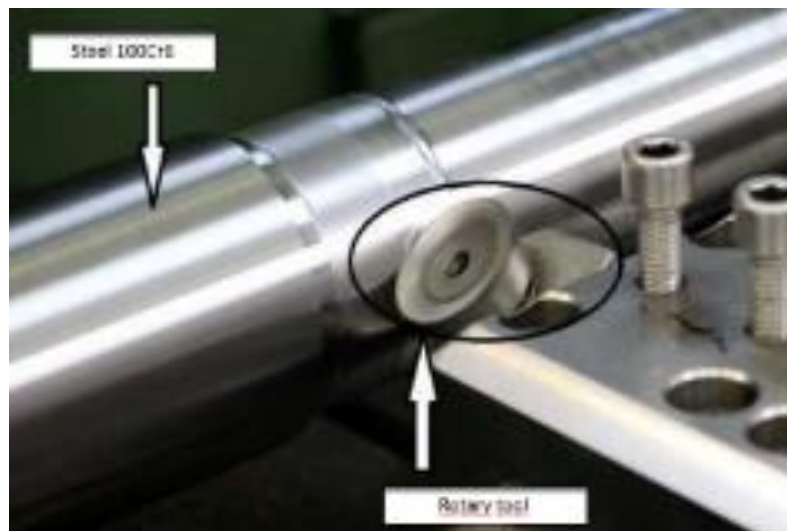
Photo of tool with the chip made of high speed cutting steel
